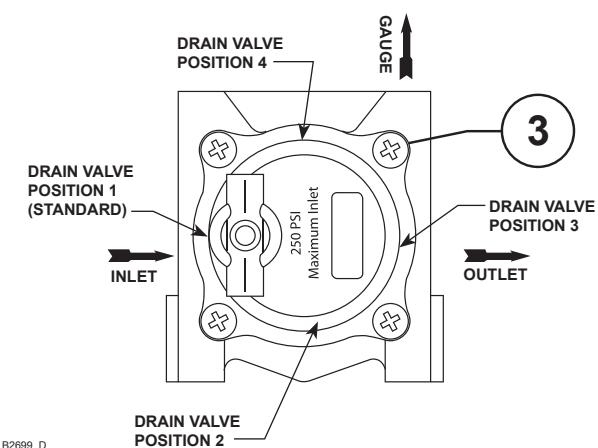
Types 67CF, 67CFR, 67CFS, and 67CFSR Drain Valve Positions
